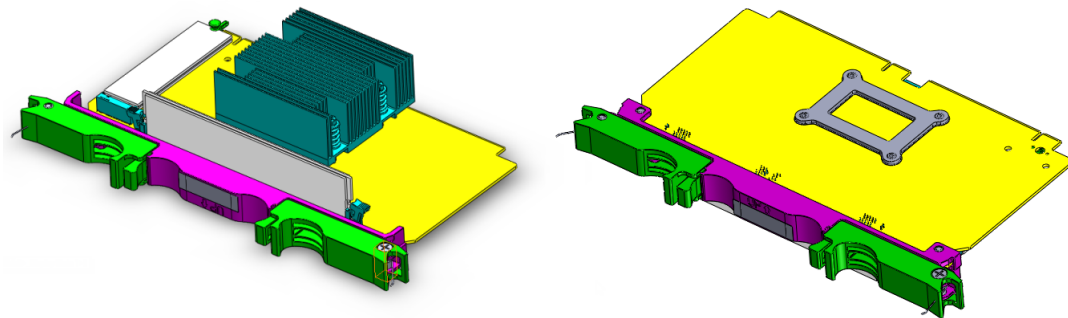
Card Retention Mechanism Mounted on 1S Server Card
